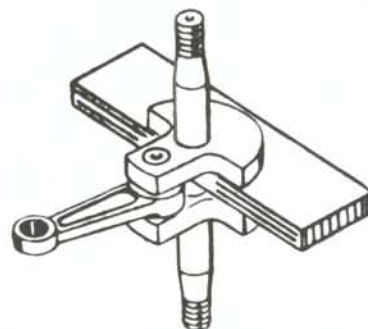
Support crankshaft behind counterweight when pressing on bearings.
